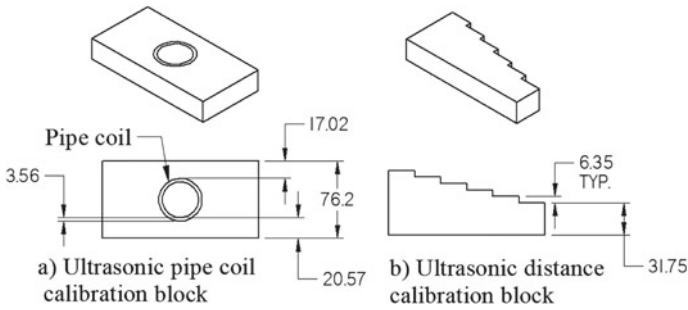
Ultrasonic testing calibration block for checking bond to pipe and to locate pipe coil (a) and stepped block for calibration of ultrasonic inspection equipment (b)
